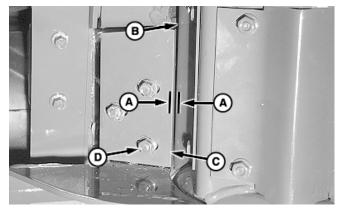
Scraper at Converging Drum Key A – Gap Key B – Drum Key C – Plate Key D – Bolt
